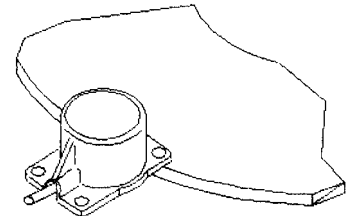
DISMOUNTING THE MOTOR OF THE CR3i
